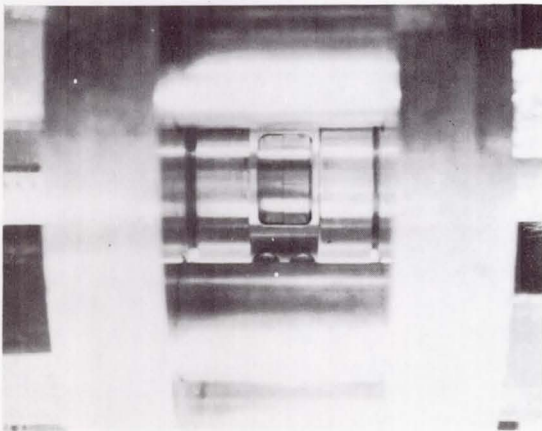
Closeup of Assembled Connector - Welding Dies Can Be Seen Through Observation Holes
